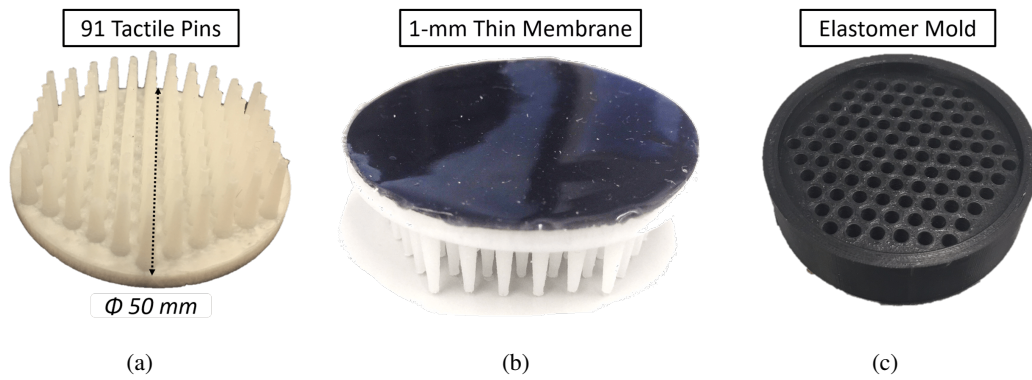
(a) View towards the bottom surface of the elastomer where 91 reflective tactile pins are attached at the surface. (b) View towards the top surface of the elastomer where a black opaque coating is mounted. (c) 3D printed mould that is used to produce the elastomer component.
